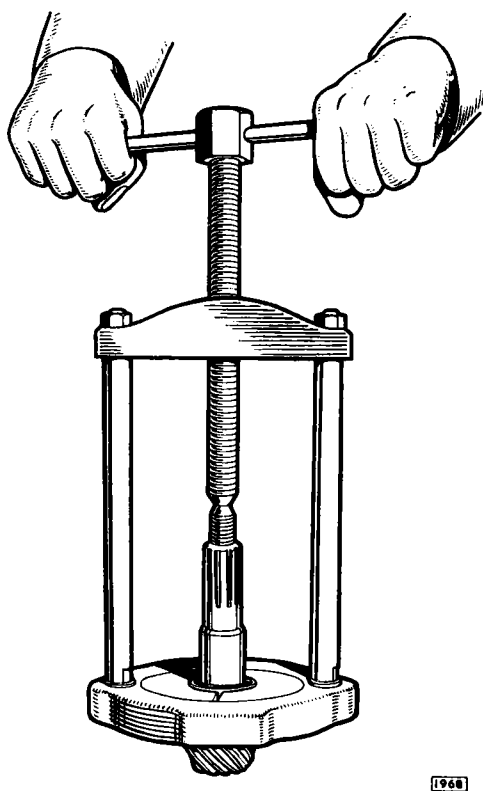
Withdrawing the pinion inner bearing using Churchill Tool No SL 14 with adaptor No. SL 14-3
